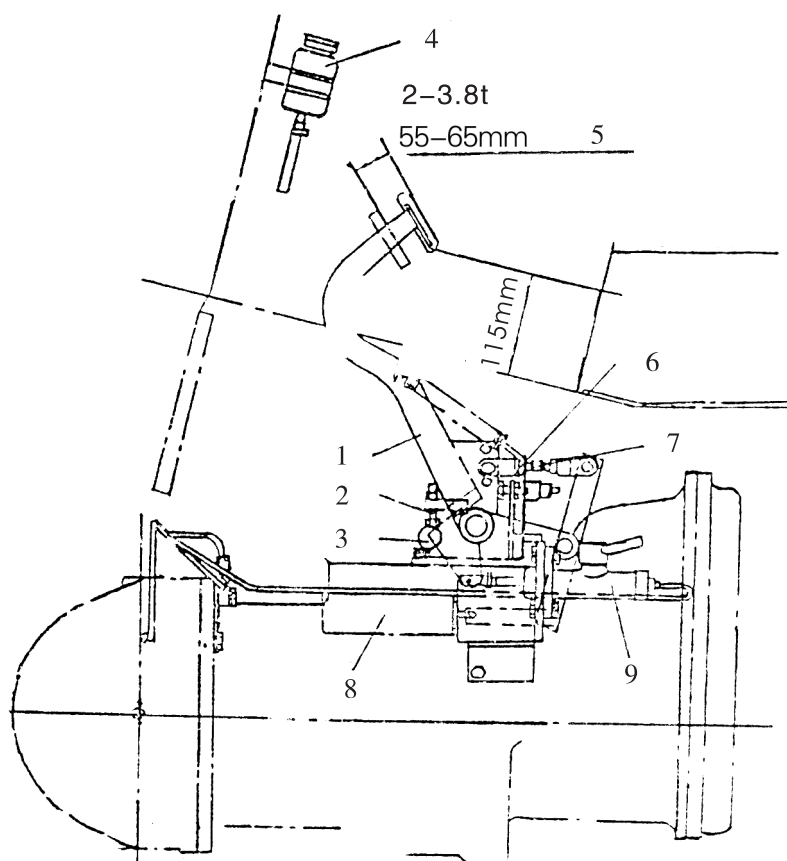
Brake pedal adjustment (truck with torque converter)
